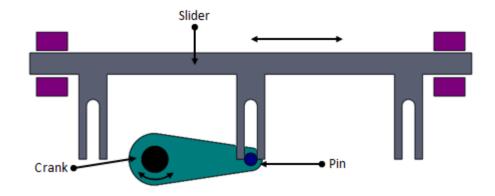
Linear intermittent motion using Geneva mechanism
